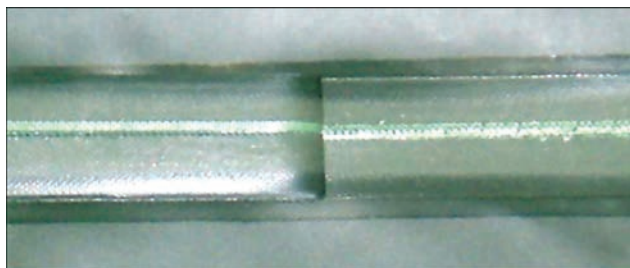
Weld of Unisol 950 laminated fabric made with insufficient heating of the welding zone
